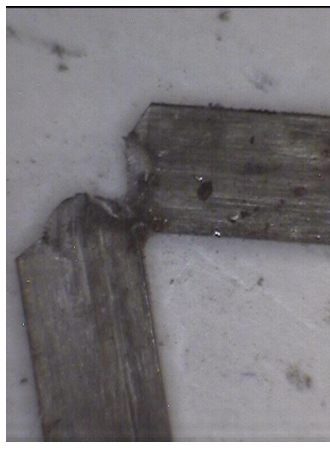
Tested impact specimens A2 11, A2 12 after testing (Macro) and after complete breaking (Macro)
